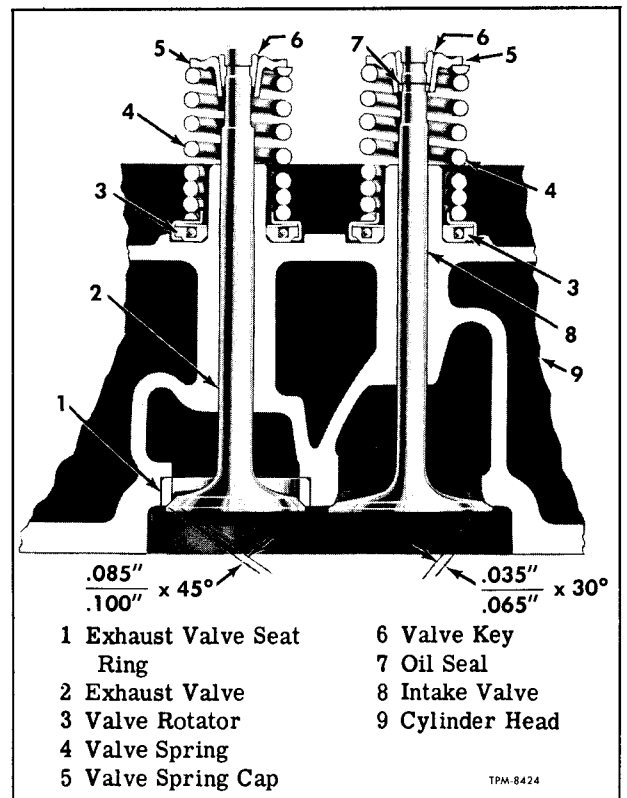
Sectional View of V6 Engine Cylinder Head Assembly
